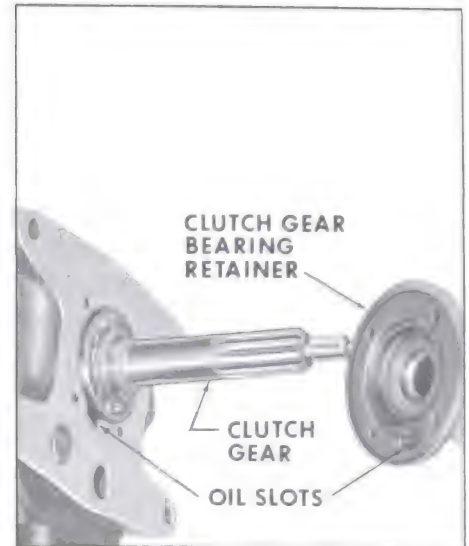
Clutch Gear Bearing Retainer Oil Slot
